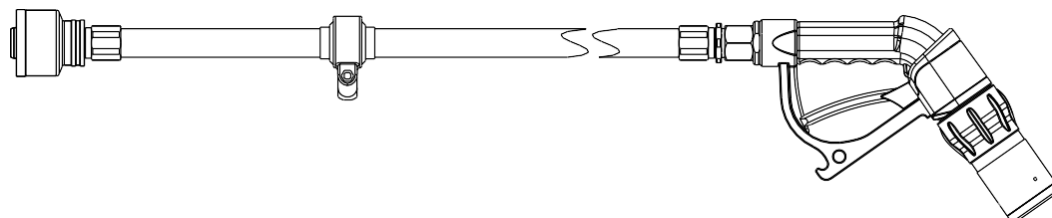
Hose Assembly PULSE C LPG Delivery Mk2
